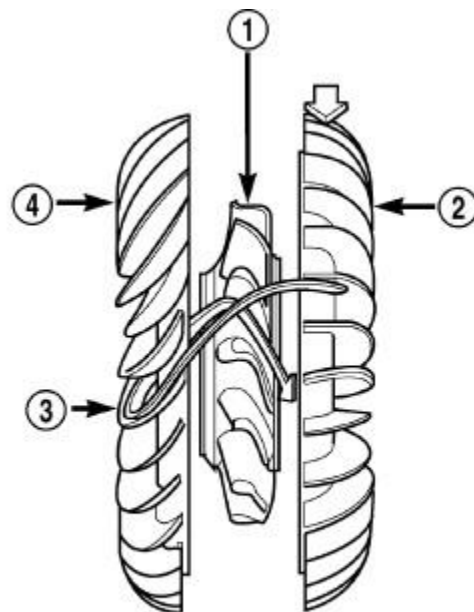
Stator, Impeller, Fluid Flow & Turbine
